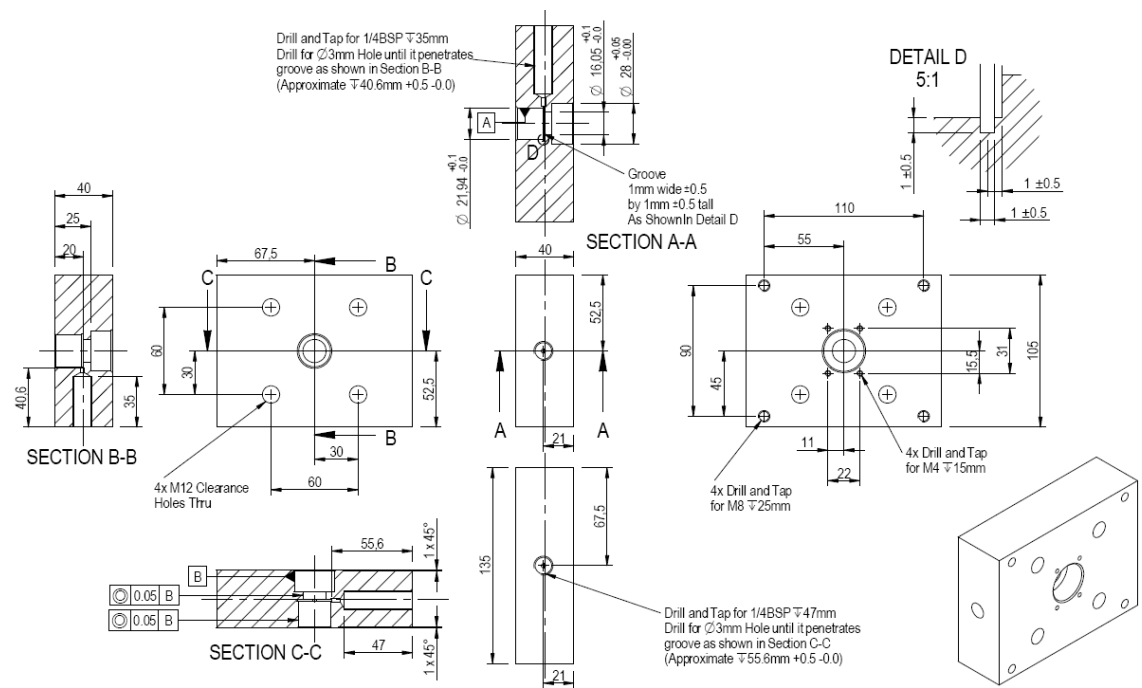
End housing block for active seal assembly with square o-ring sealing element
